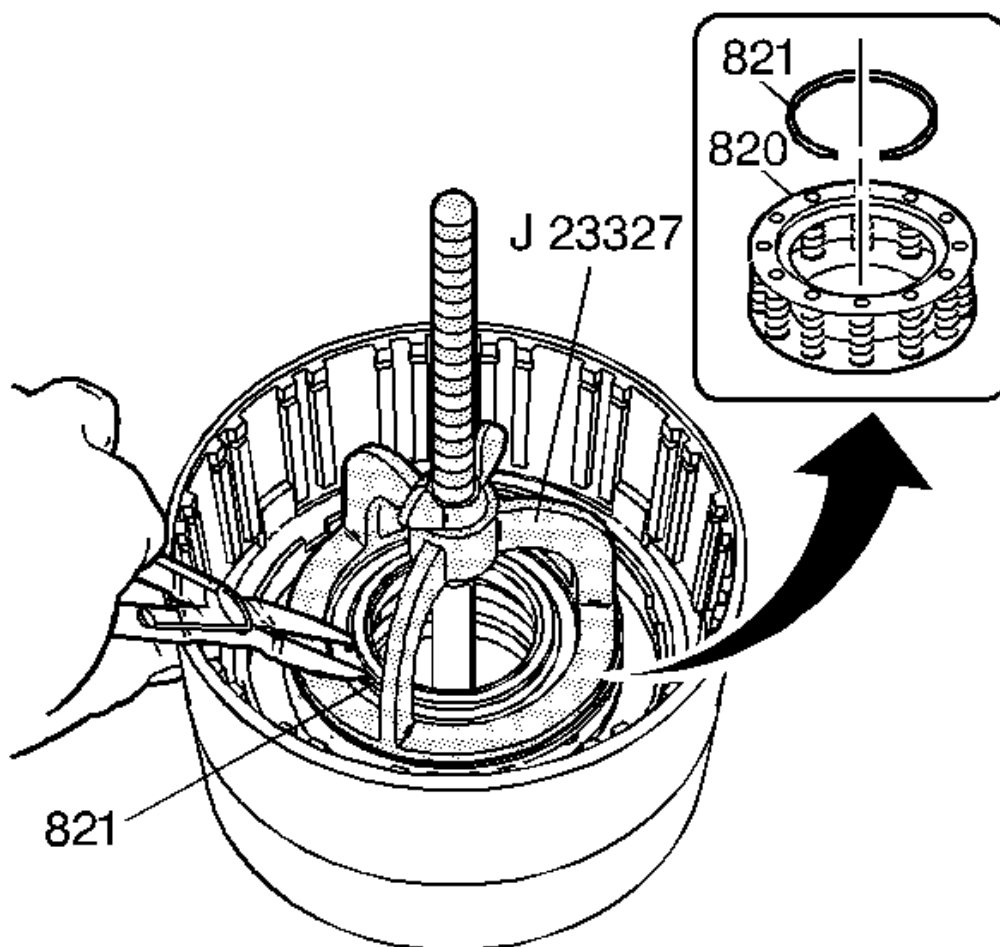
Compressing Spring And Retainer Assembly Using The J 23327
